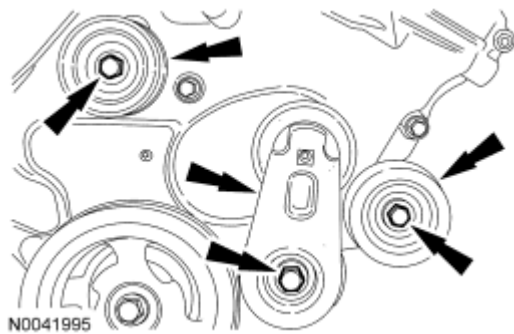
Locating Accessory Drive Belt Tensioner And Idler Pulleys
